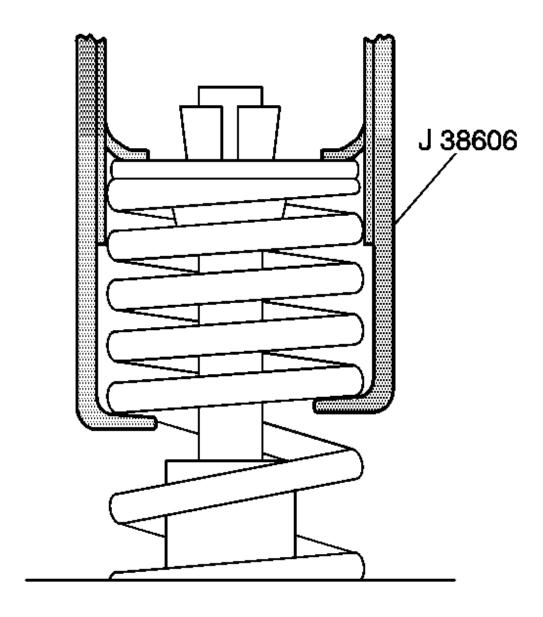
Compressing Valve Spring Courtesy of GENERAL MOTORS CORP.
